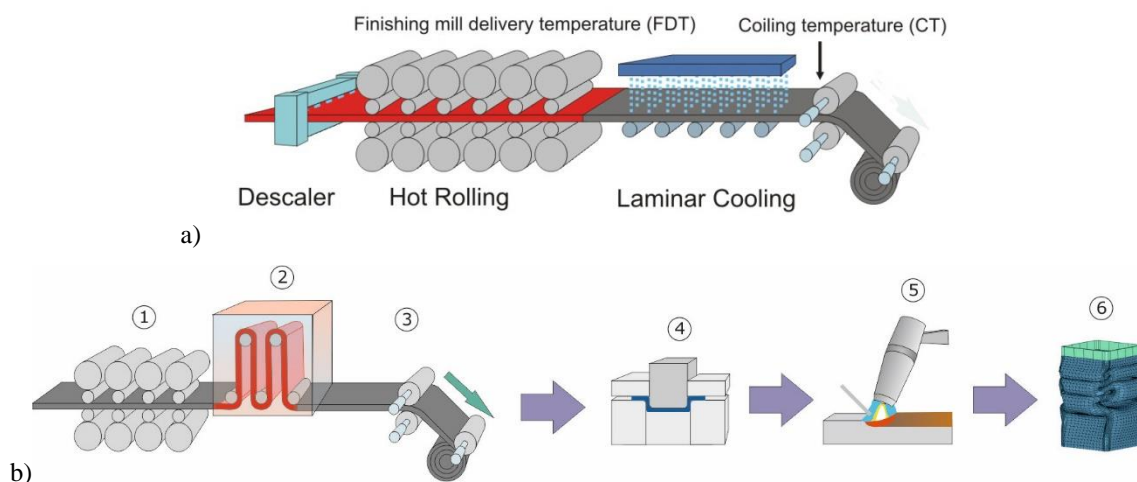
Schematic illustration of the investigated process: a) hot rolling (only finishing part is presented for simplicity), b) cold rolling (1), followed by continuous annealing (2), coiling (3), stamping (4), welding (5) and final product (6)
